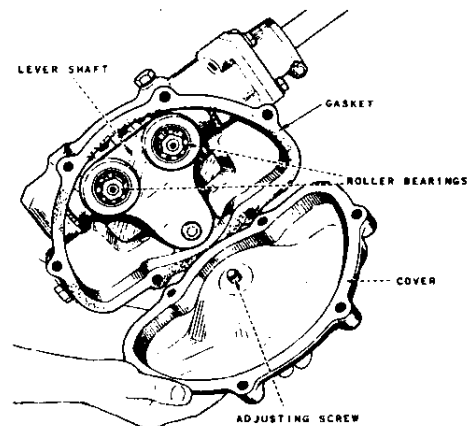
REMOVAL OF HOUSING SIDEGEAR COVER
